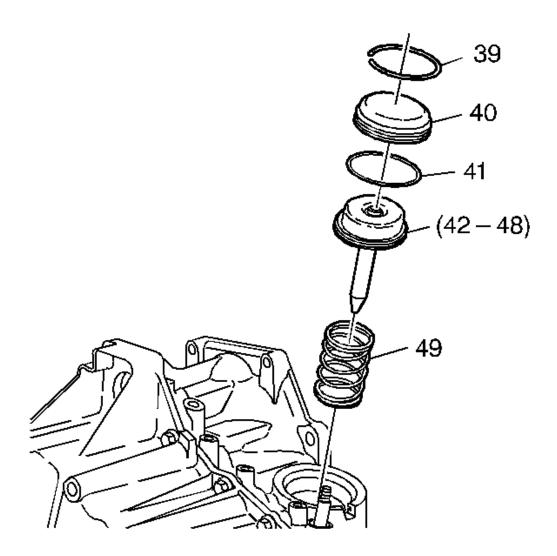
Identifying Reverse Servo Assembly Components Courtesy of GENERAL MOTORS COMPANY
